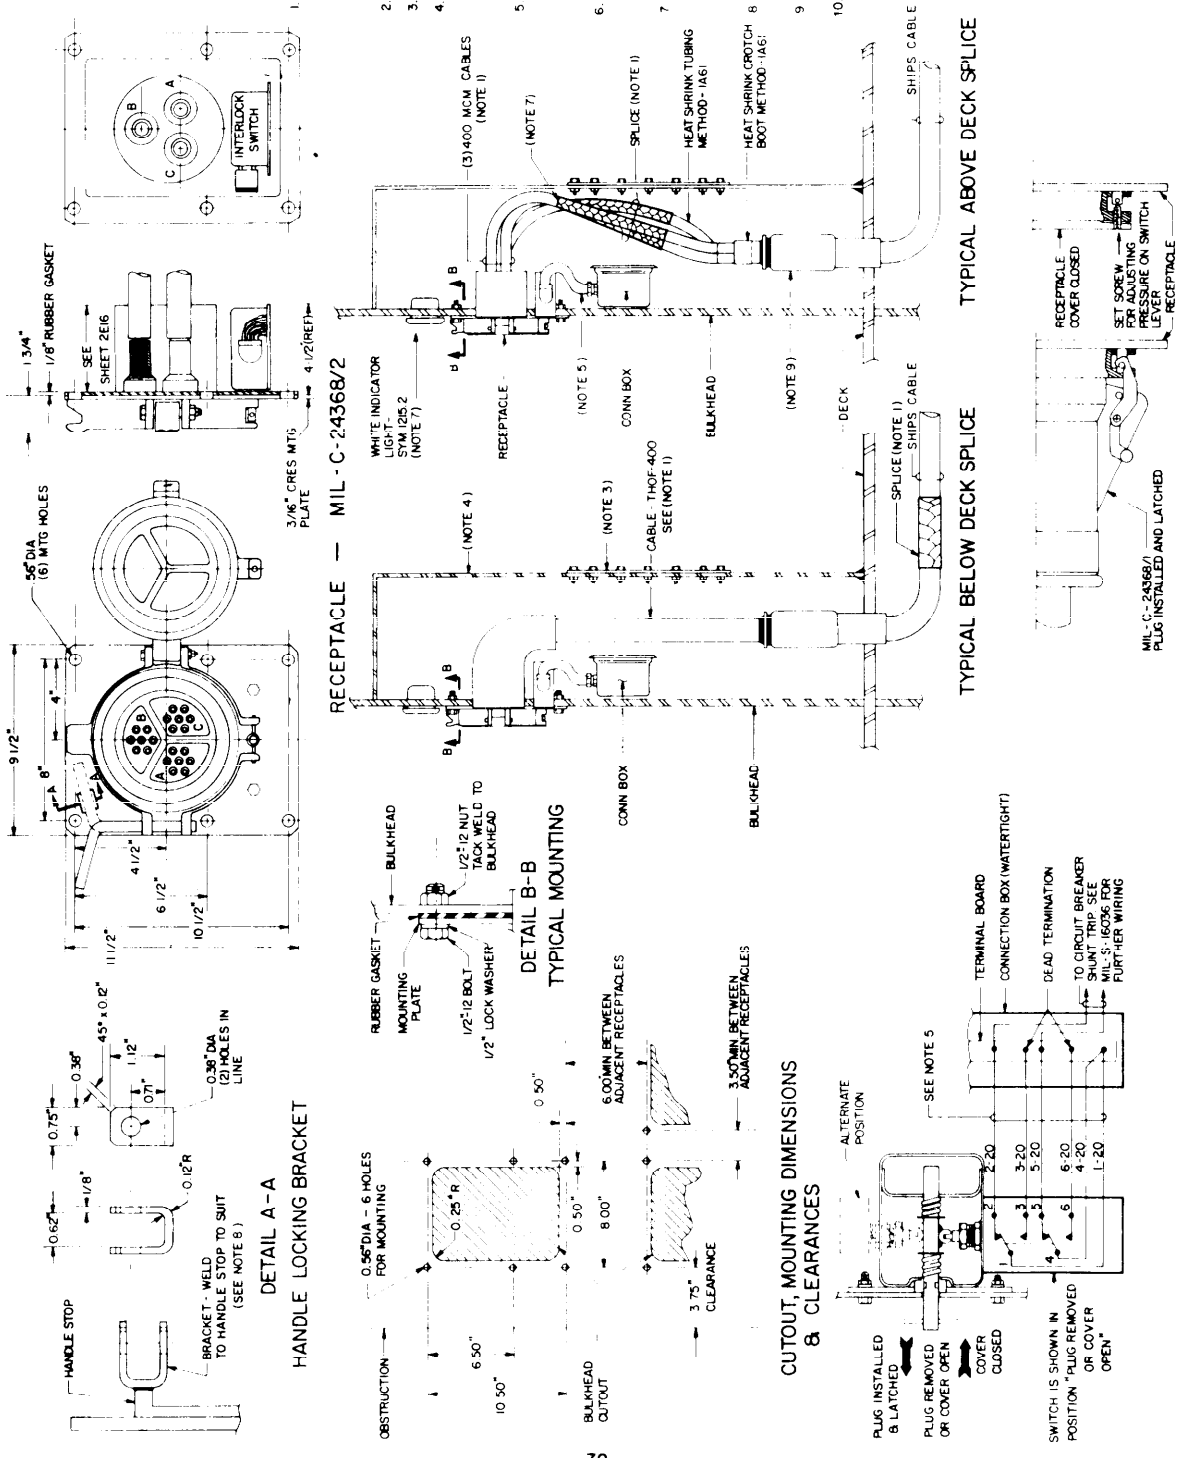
E18. Installation details for shore power receptacle MIL-C-24368/2.
